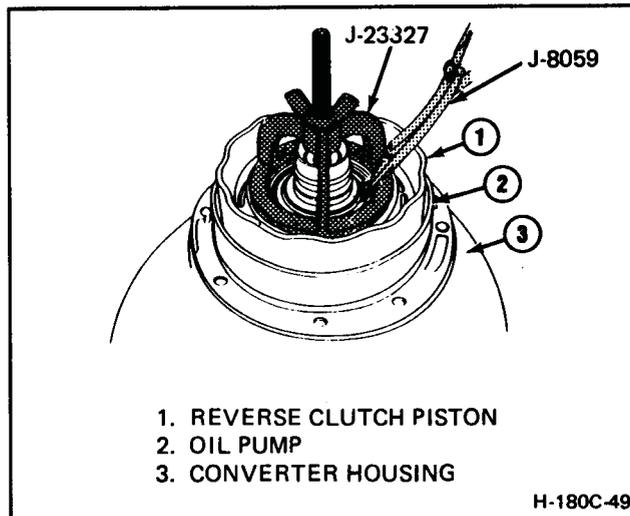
C-60 Compressing Reverse Clutch Piston Retainer
